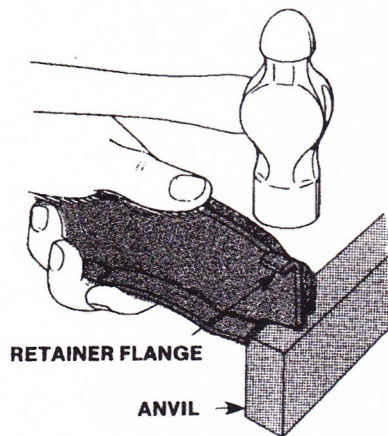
Bend the retaining flange if there is excessive free play.
